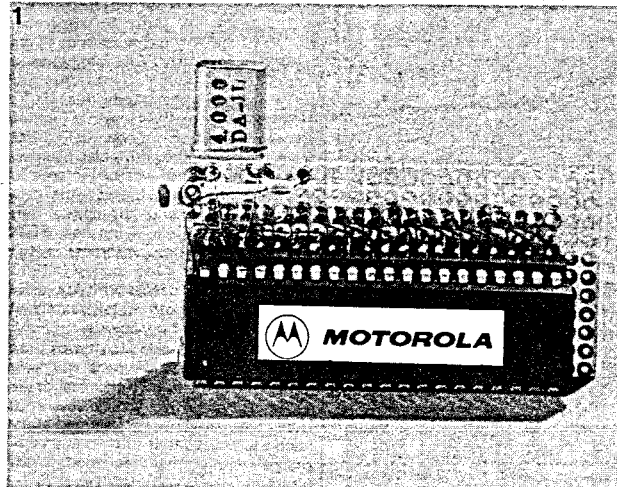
How to construct the piggy-back board for the 6502 socket. The new CPU board is mounted on a 40-pin DIL connector.
